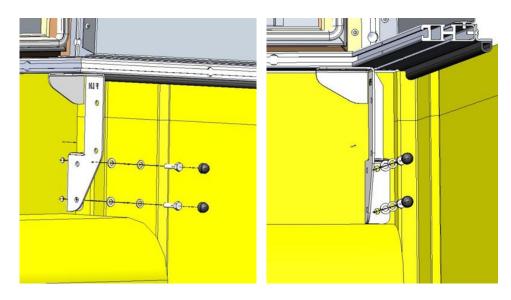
Position Front Riser Brackets over the mounting holes on the load bin and fasten with 2x M8x30 Hex bolts, washers, nyloc nuts and nut caps.
